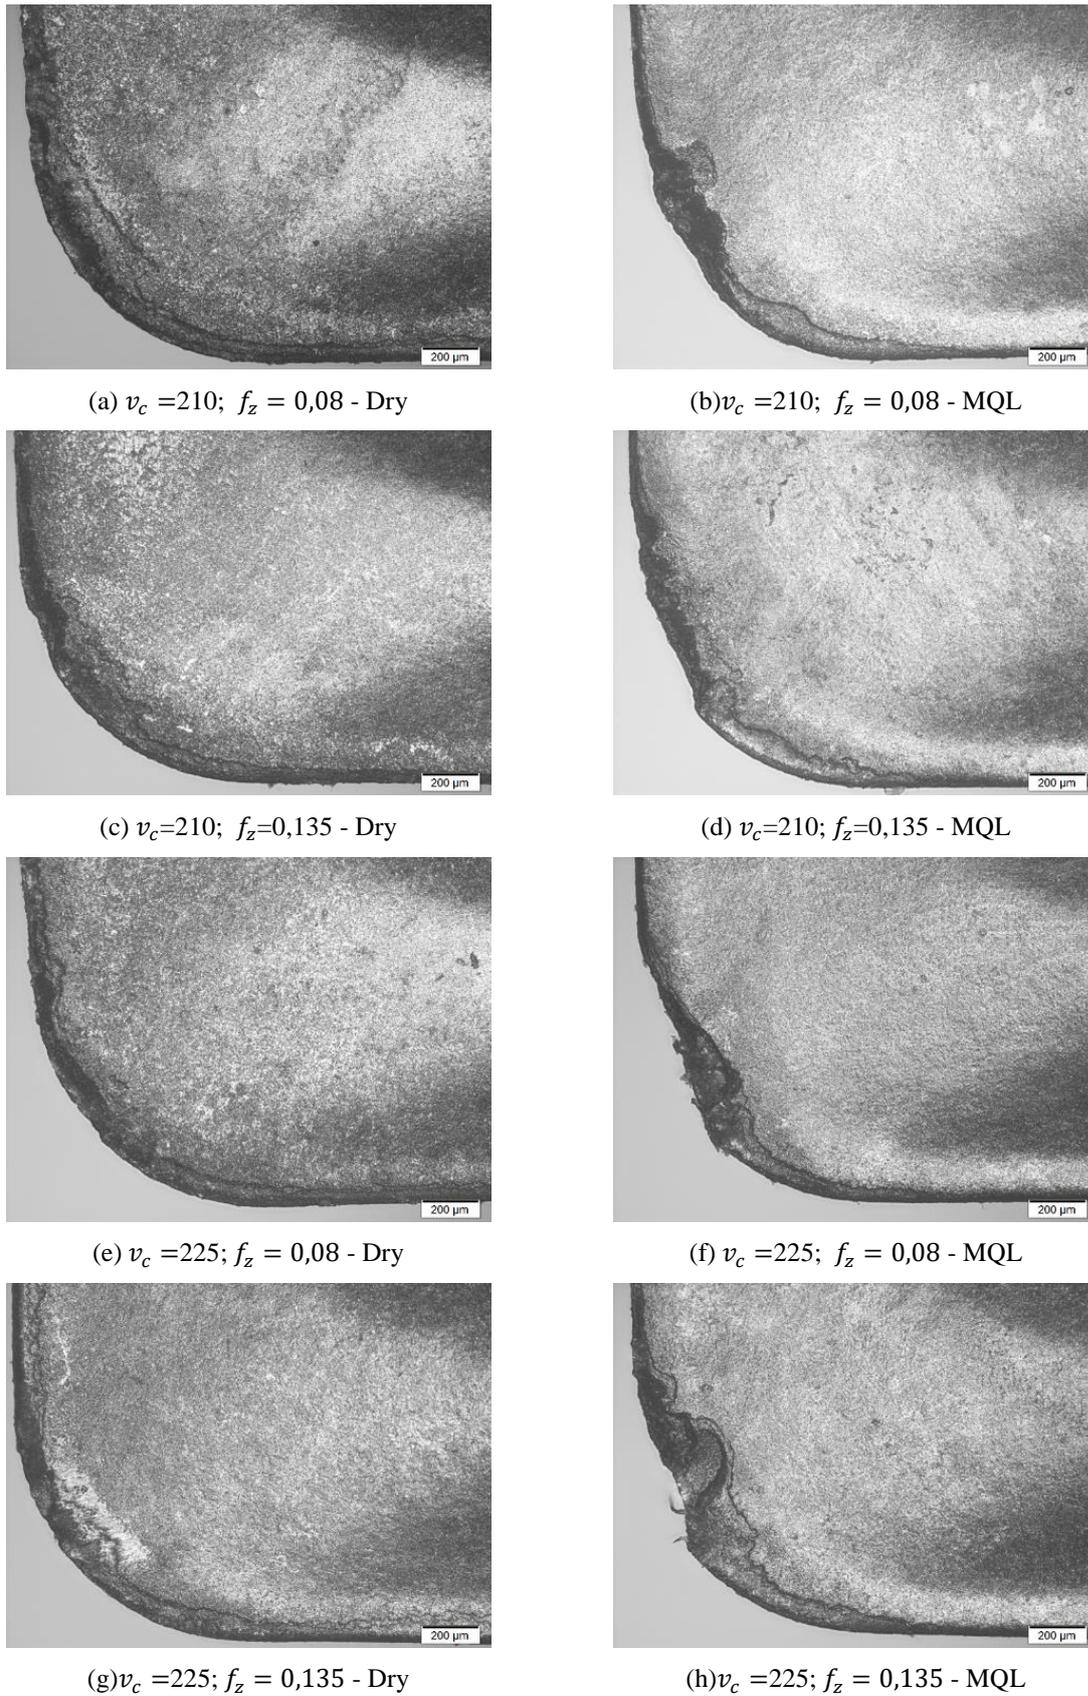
Tool wear investigated at different parameters (units: v_c : m/min e f_z : mm/tooth), OM.
